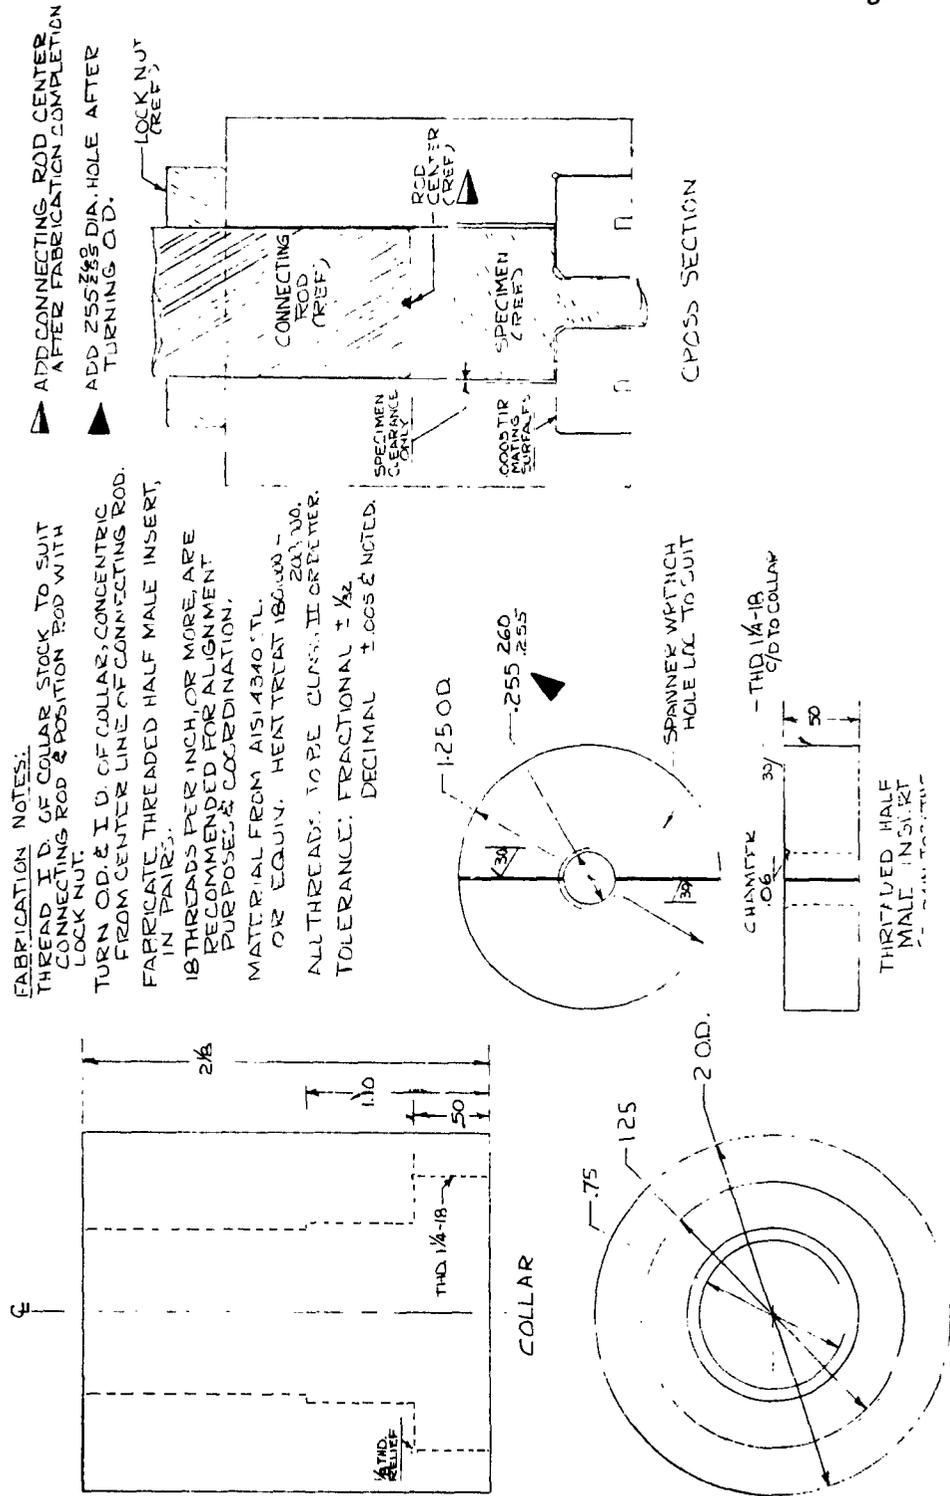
NOTCHED TENSILE SPECIMEN GRIP ADAPTER ASSEMBLY
